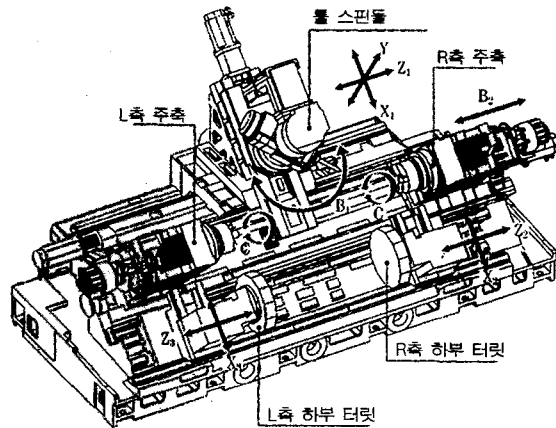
Control axes of turning center based multi-process machine (Nakamuraryu, STW-40)
